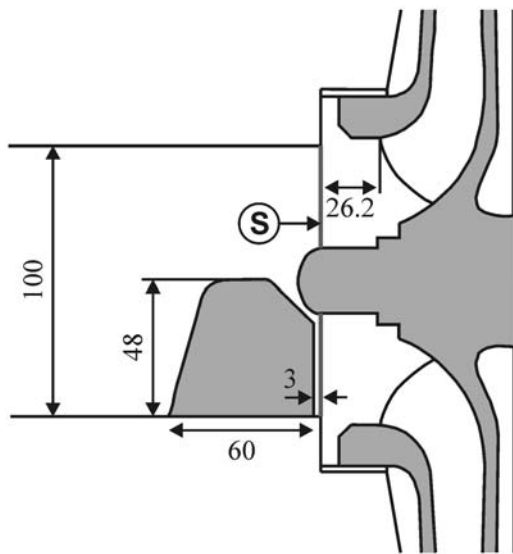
Detail of pump's geometry at the inlet of the impeller, showing the inlet guide vane and the measurement section S
